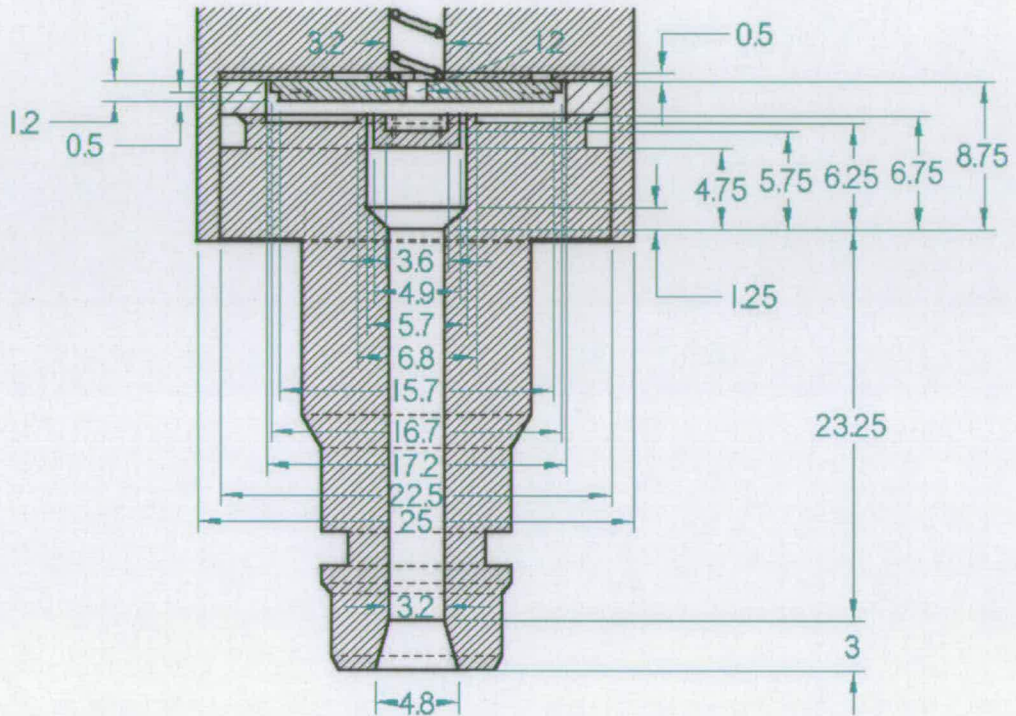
Annular Plate Injector Flow Path Geometry Dimensions (mm)
